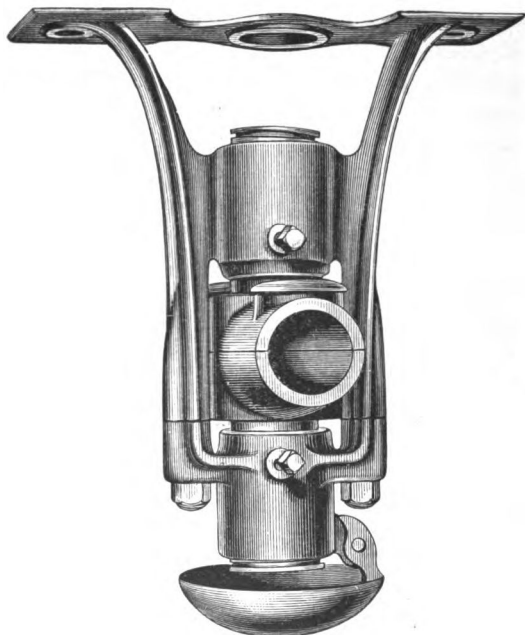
shows a form of hanger similar to our regular line hangers, with open end, called OPEN END LINE HANGERS. These are lighter than our regular head-shaft hanger, and serve the same purpose where applicable.
